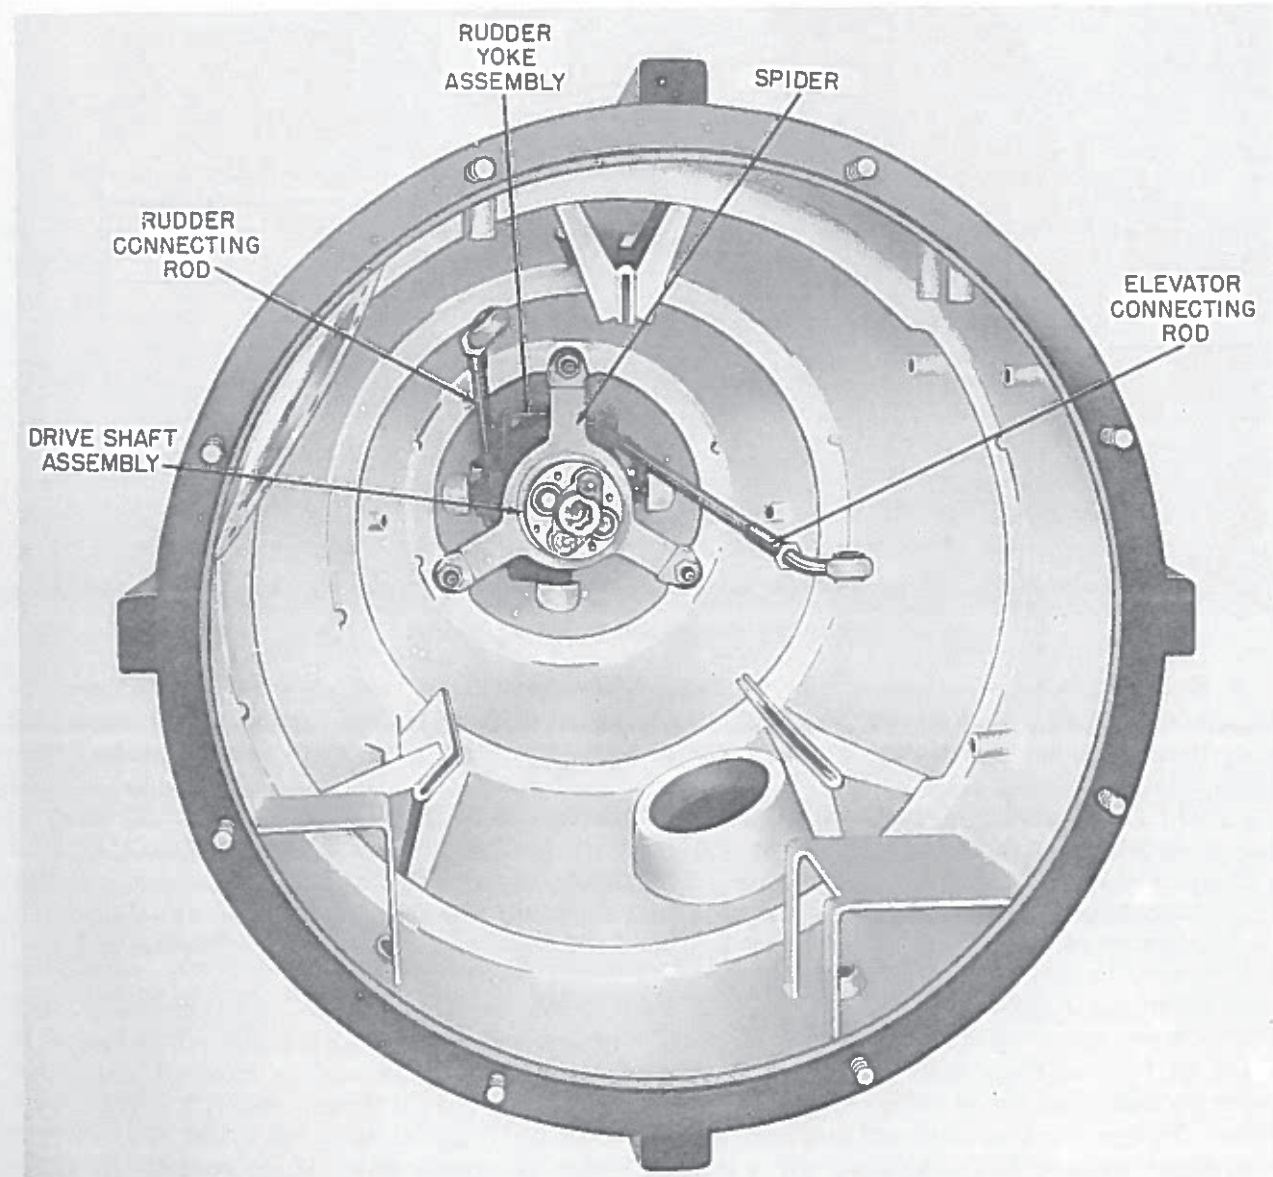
Afterbody Shell Showing Connecting Rods, Cross Strut and Stern Bearing, and Yoke Assemblies.
